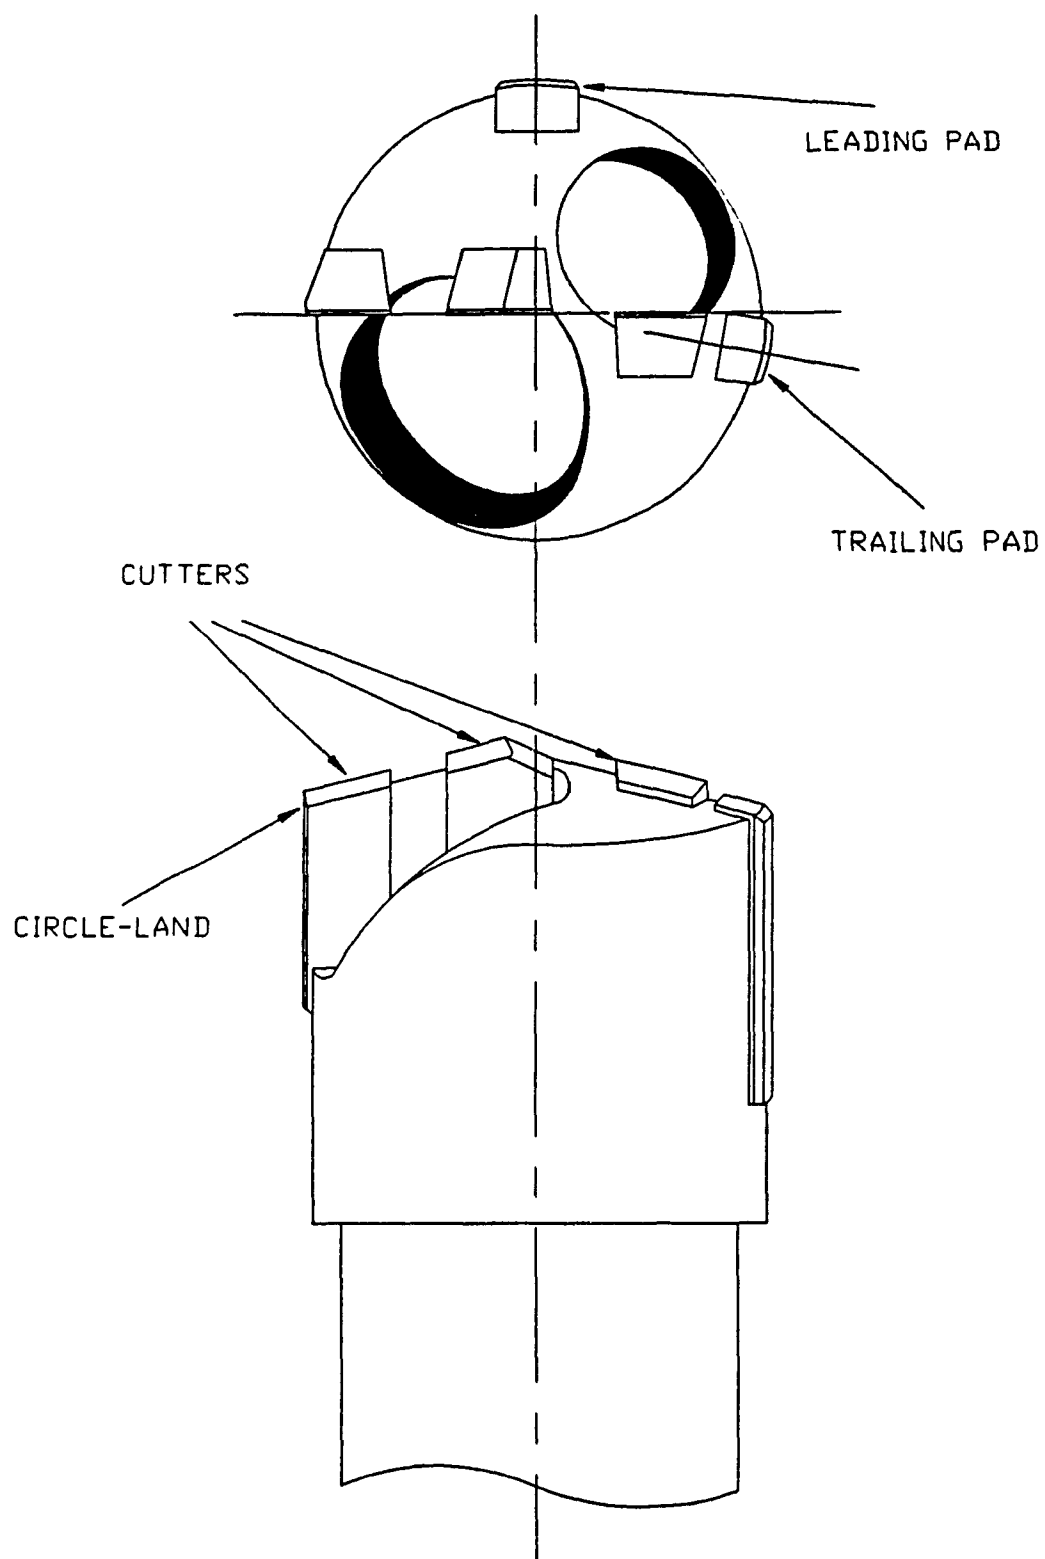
BTA TOOL WITH DISTRIBUTED CUTTERS
